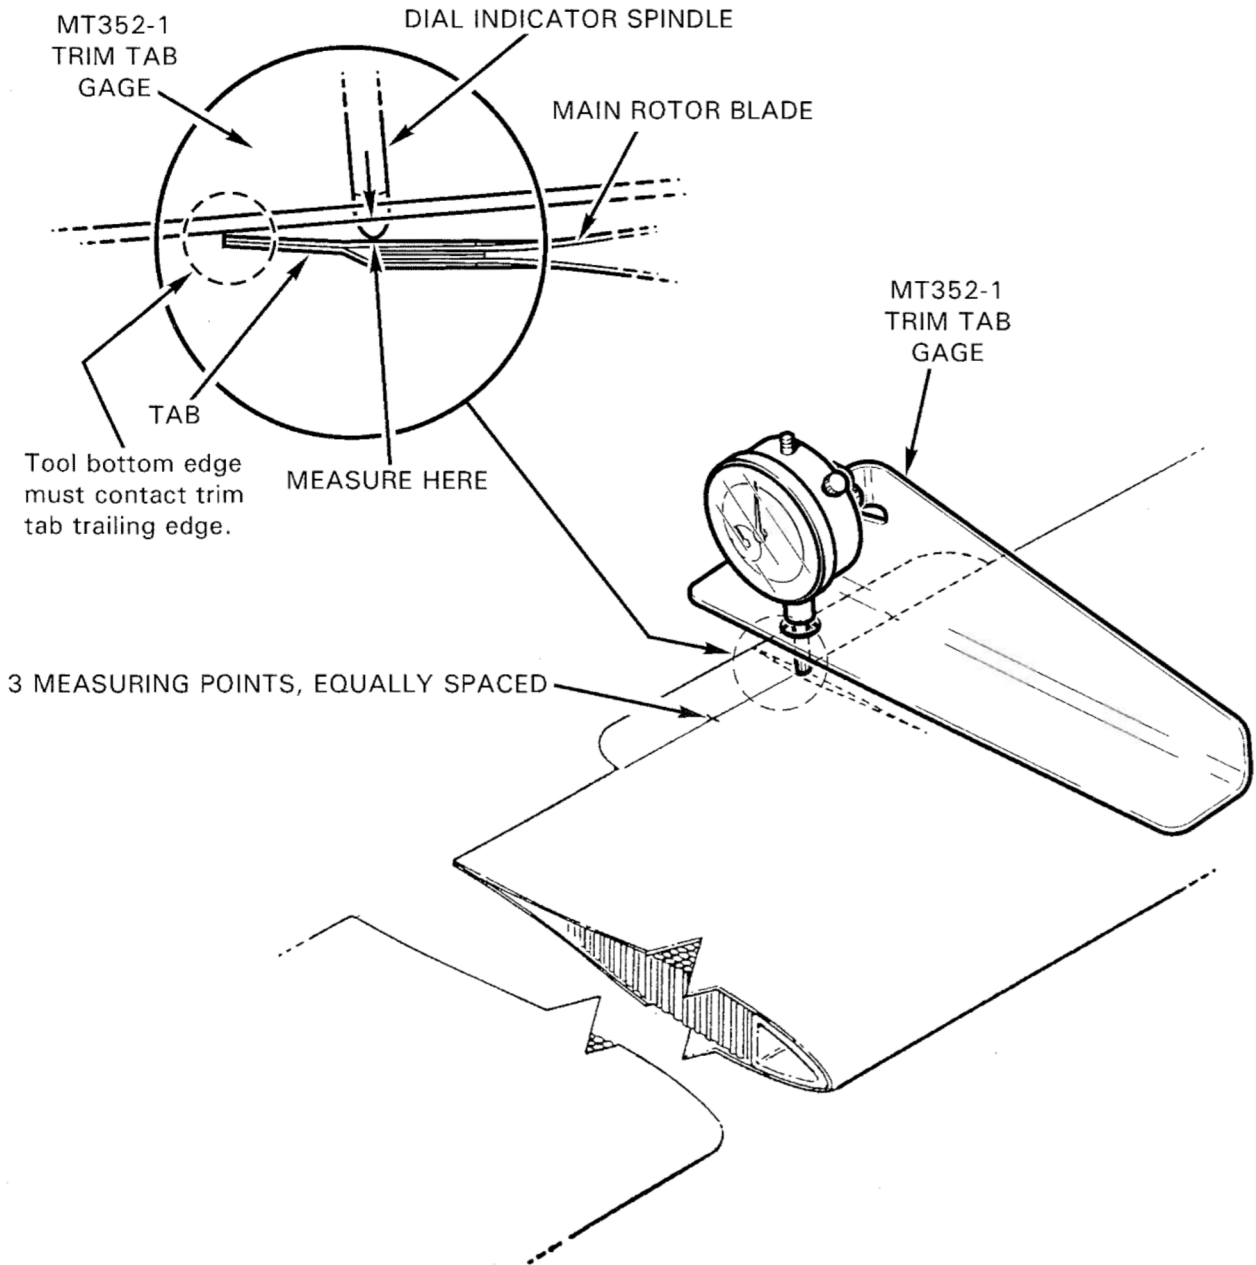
MAIN ROTOR TRIM TAB MEASUREMENT
